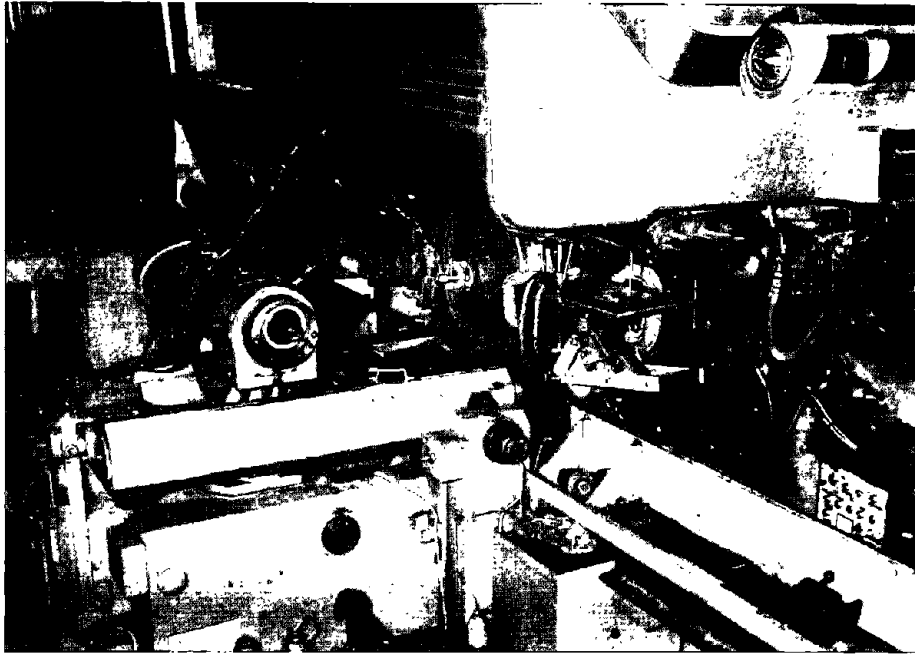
THE HEGENSCHIEDT WHEEL-TRUING MACHINE SET UP FOR MEASURING WHEEL ROUGHNESS (TTC PHOTOS).
